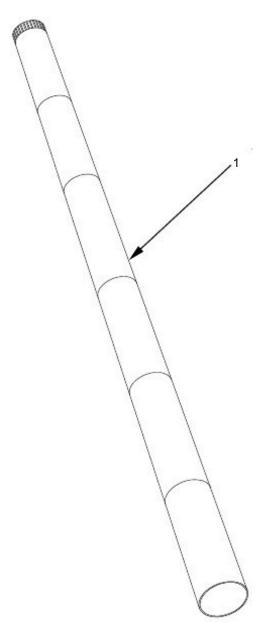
Group 02 Stack Assembly 0032 00-(1 Blank)/2
